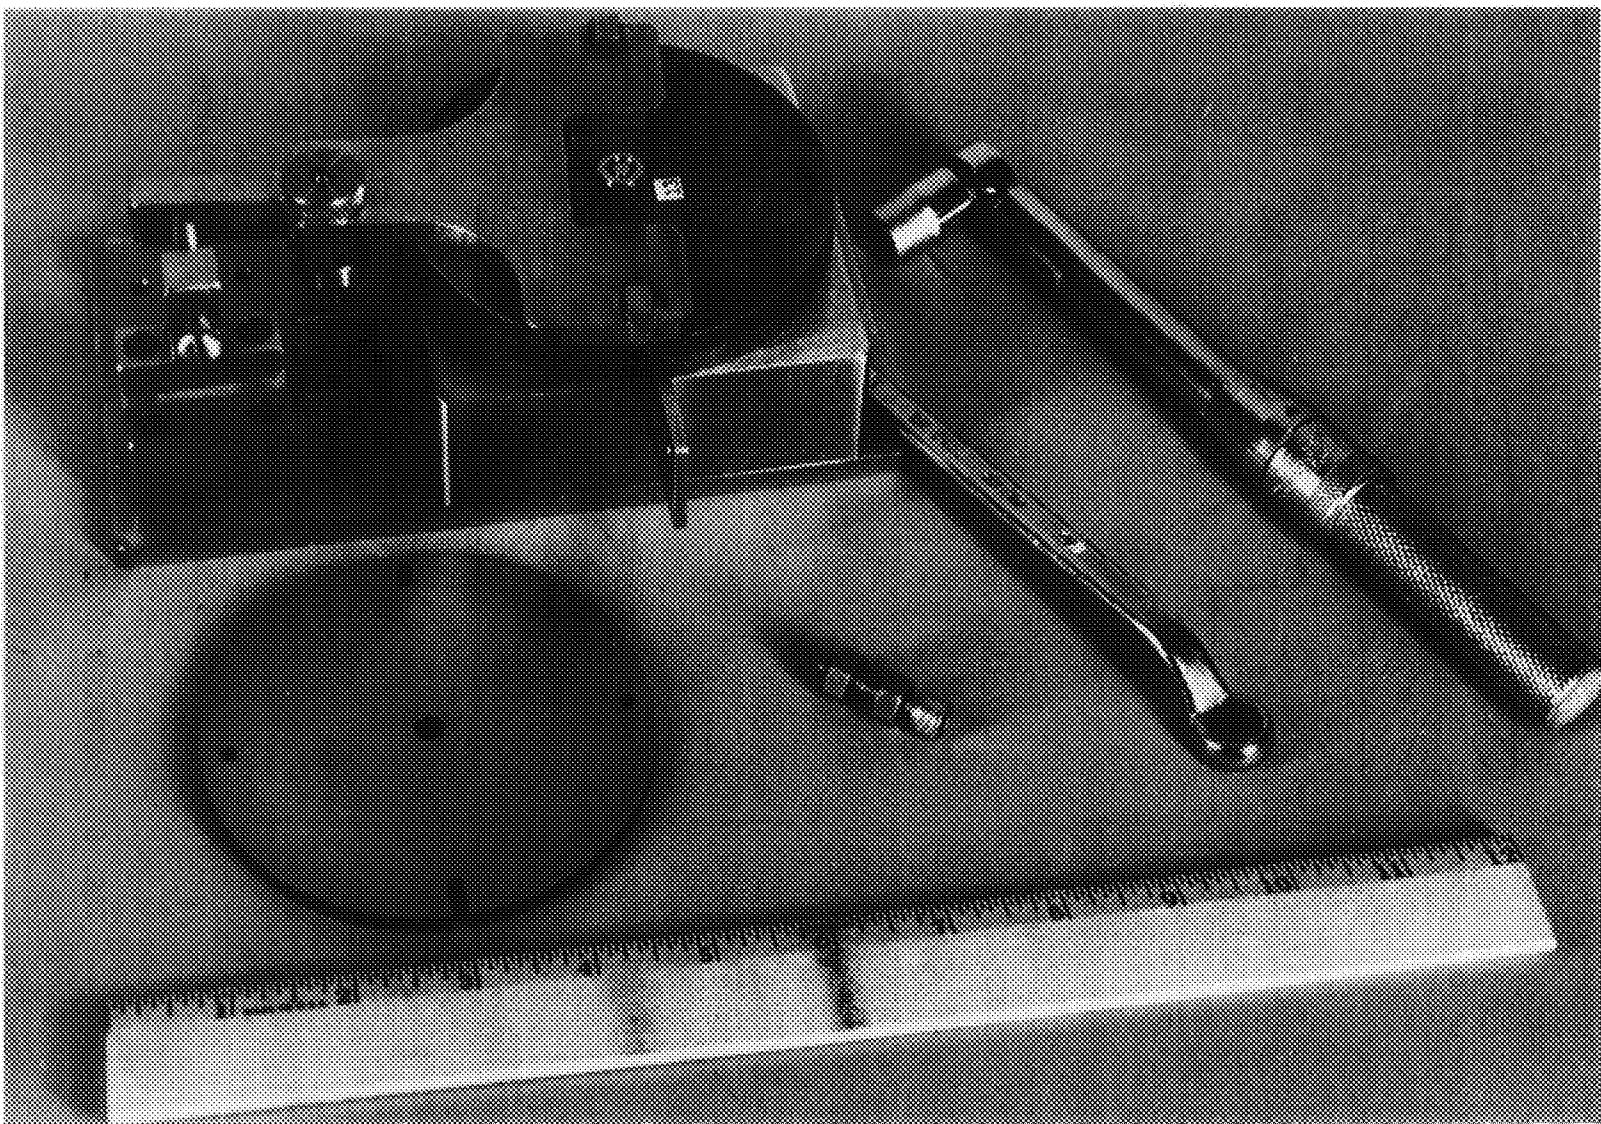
PLATE SPECIMEN, BOLT AND NUTS, FIXTURE AND TOOLS.
